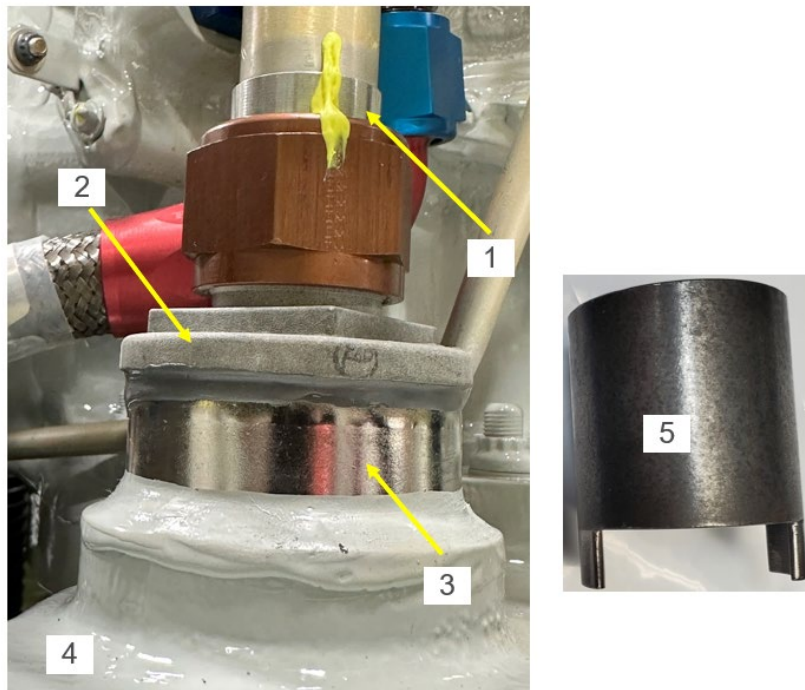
, Detail A. Cap assembly 205-040-136-001 and adapter FC-3662.
